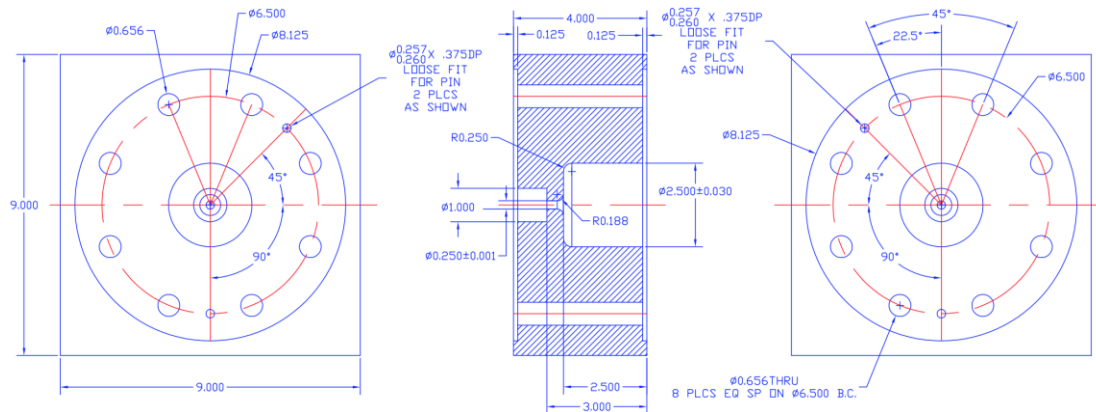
Diagram of orifice plate test block with front, back and cross-sectional views and all relevant dimensions.
